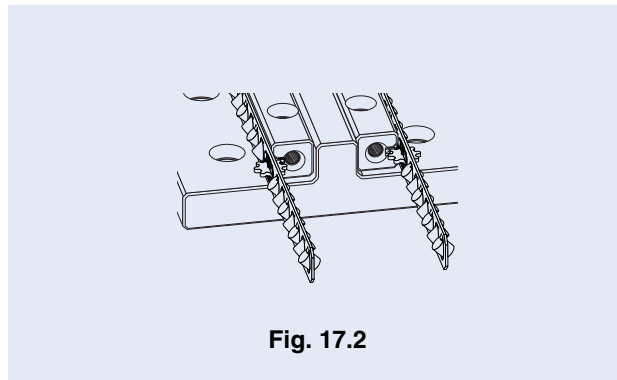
Mounting of ways at table side (for Anti-Creep Cage Crossed Roller Way)
